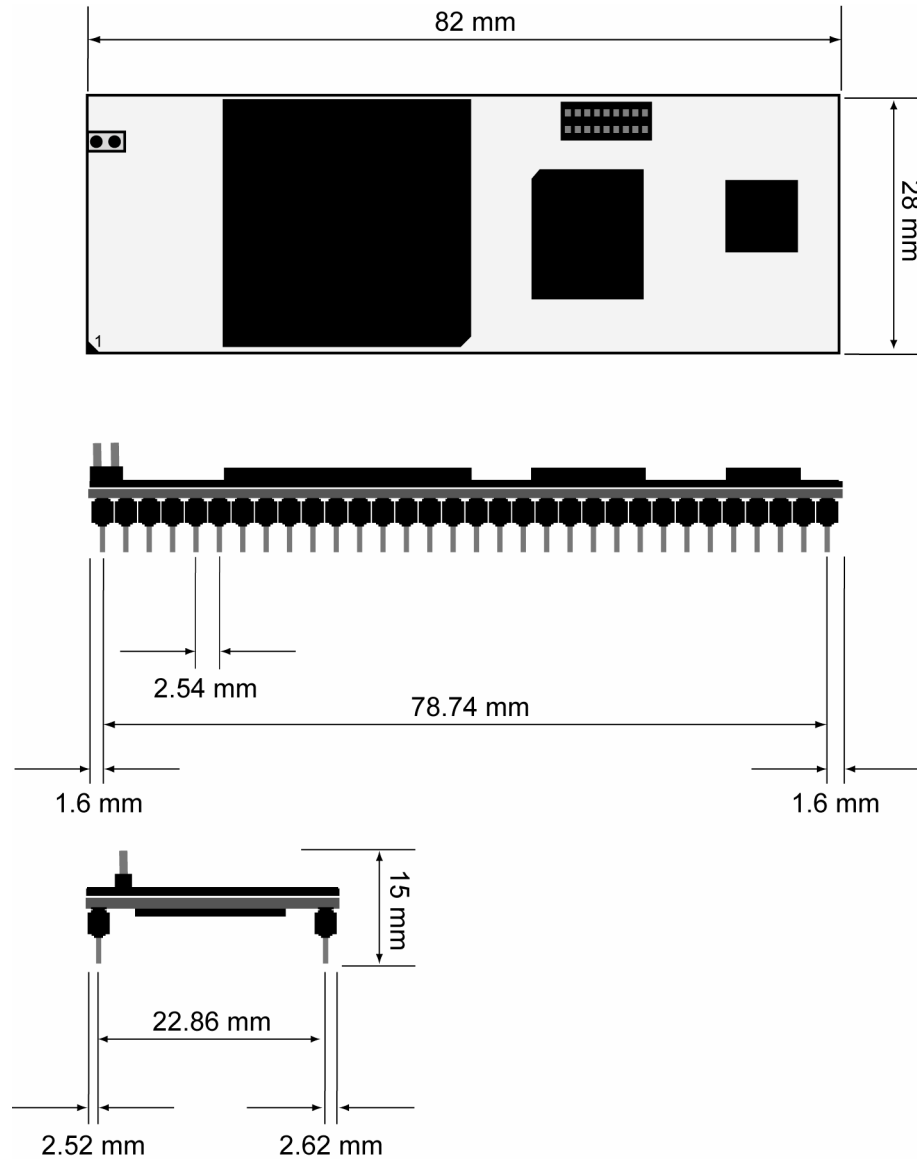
Mechanical dimensions of DIL/NetPC DNP/2486
